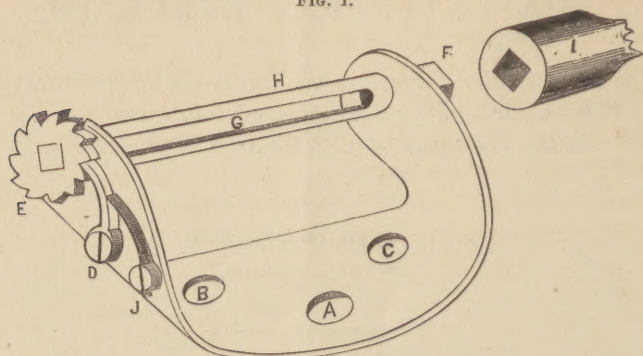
EXTENSION WINDLASS.—A, B, and C, holes for screws or tacks; H, winding-rod, slotted at G, squared at F for key I, and held in position by ratchet E and pinion D, with spring-attachment J. Length of the winding-rod, two and one-quarter inches; between the arms of the brackets, one and three-quarters inch.
